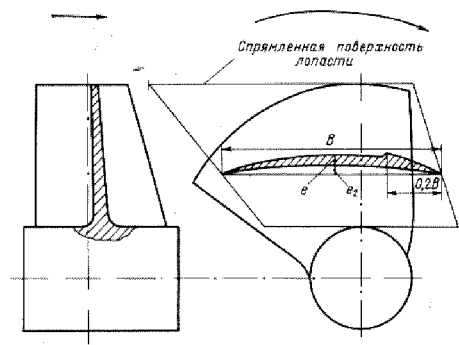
Blade geometry drawing of ventilated waterjet impeller blade [18]
